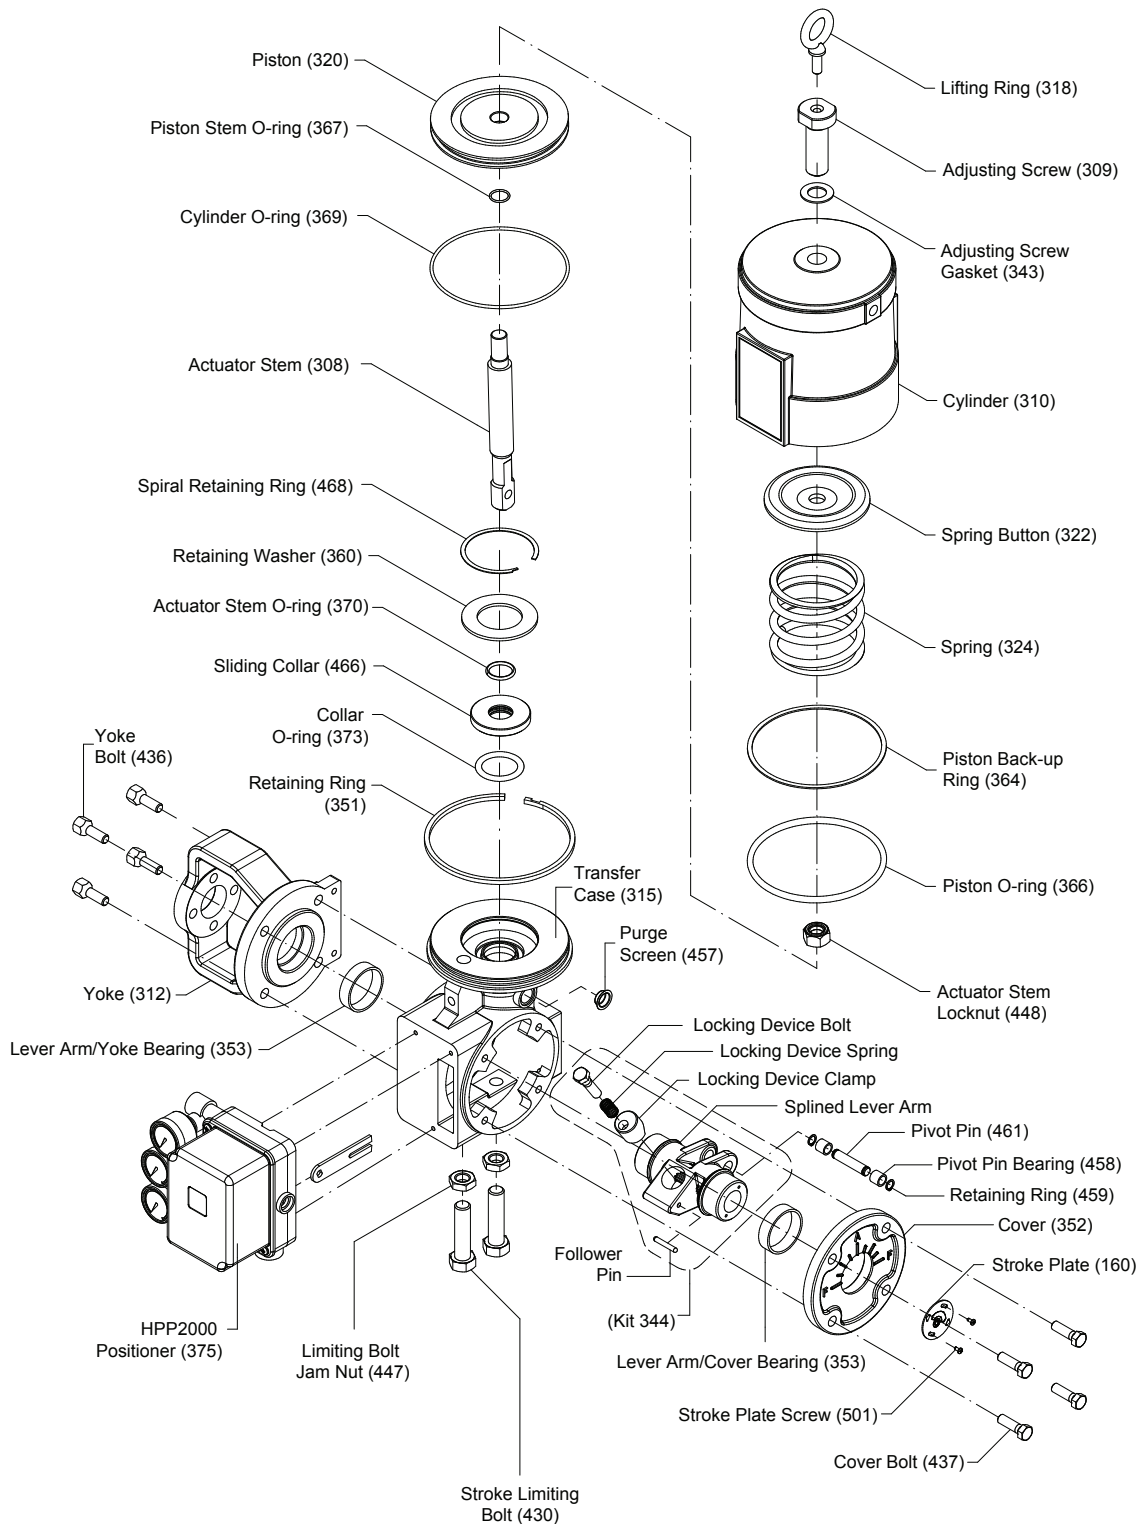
Exploded View, Spring-Cylinder Rotary Actuator with Splined Lever Arm
